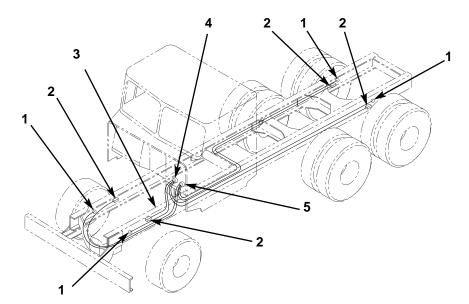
Removing Wheel Sensor and Modulator Harnesses.
